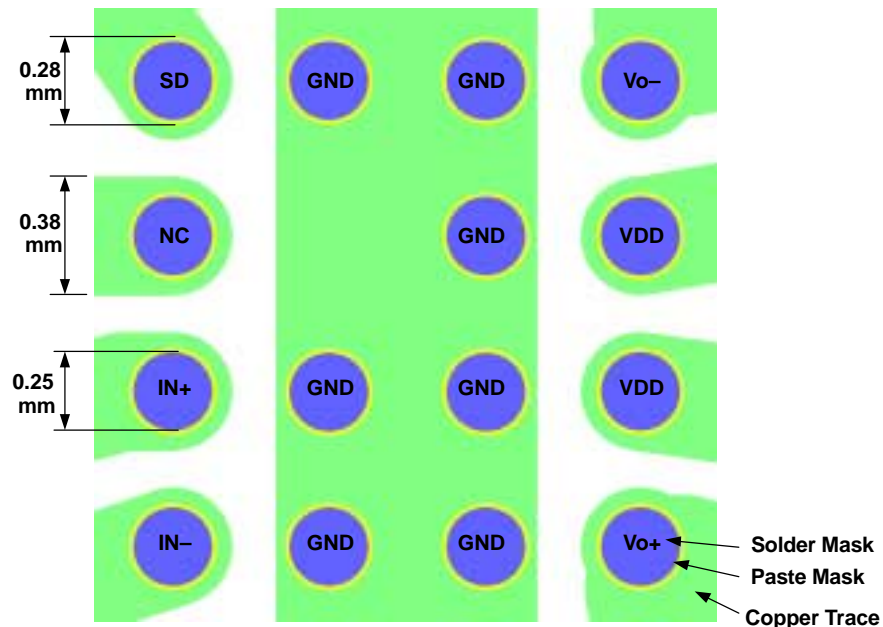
TPA2005D1 MicroStar Junior BGA Board Layout (Top View)
